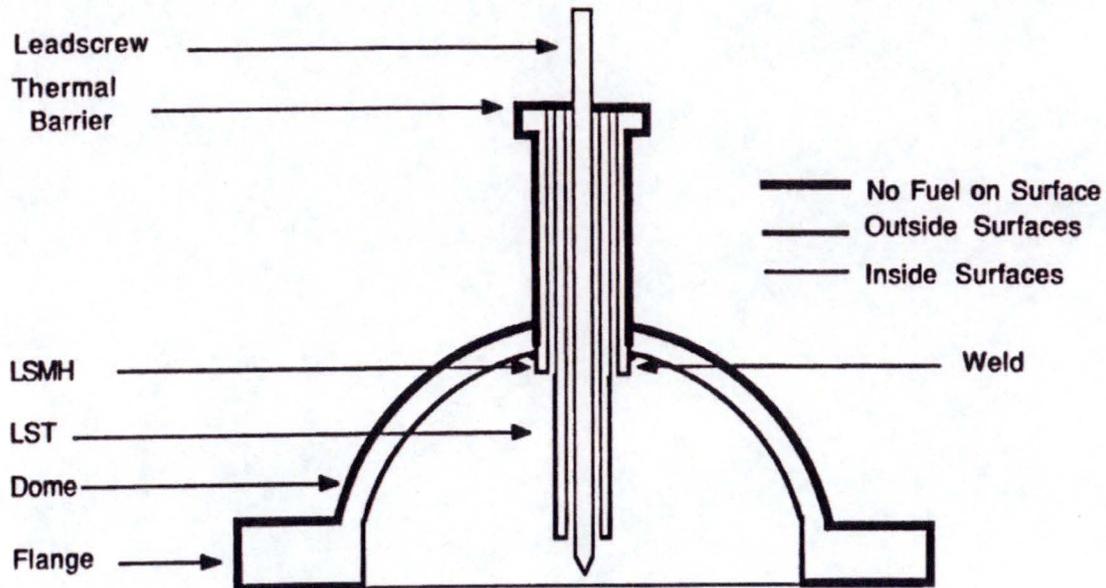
RV Head Assembly Component Surfaces (Ref. [7], Figure 4)
